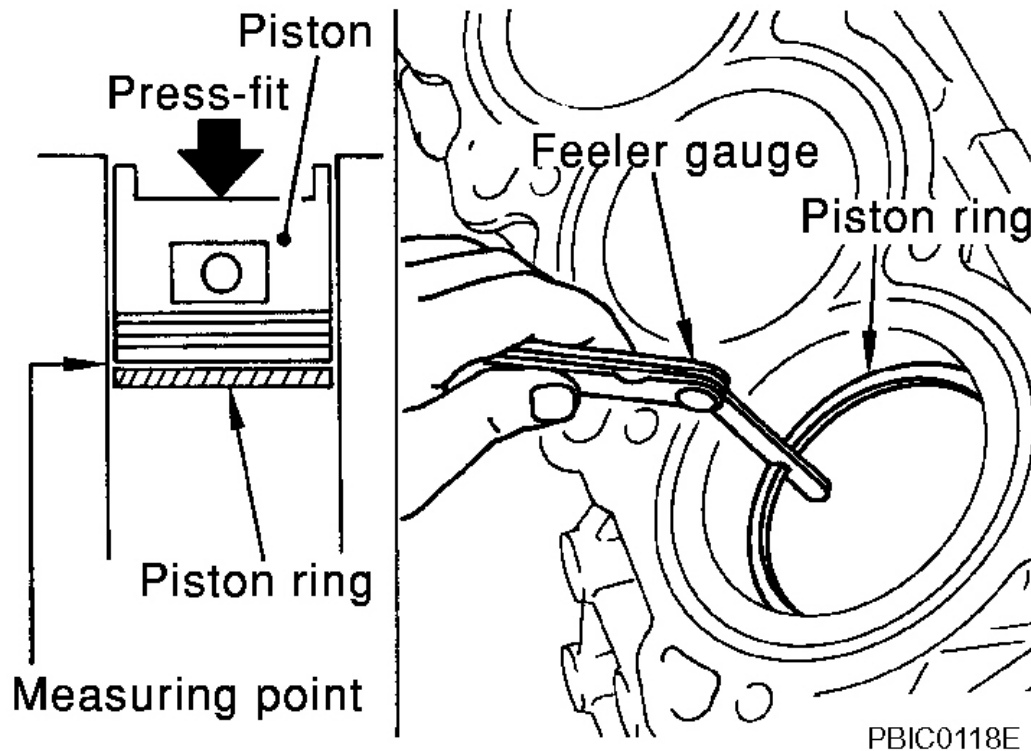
Measuring Piston Ring End Gap With Feeler Gauge
